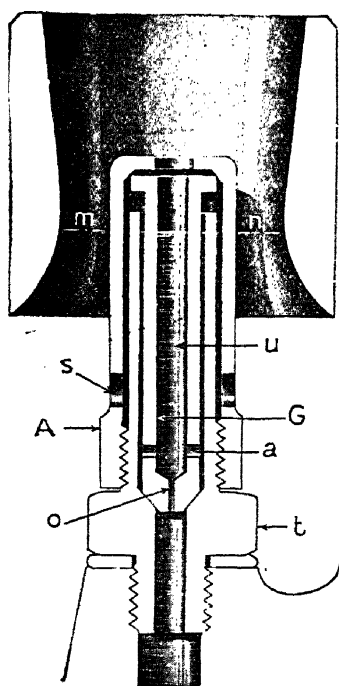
Showing Jet and Choke Tube of the Solex Carburettor.
